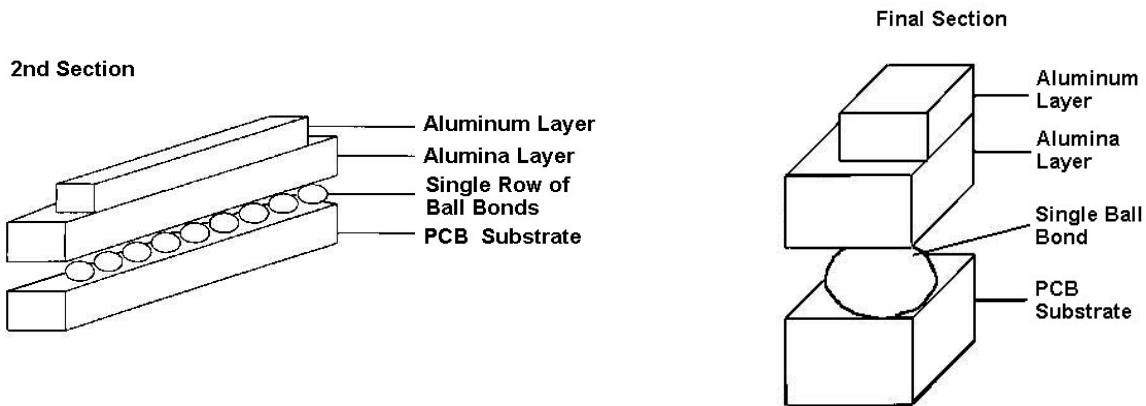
Illustration of the configurations used during cutting to produce the final section for ball bond testing. Two cuts are initially made to make a thin cross section slice (2nd section) and then a final cut perpendicular to the first two is made, creating the single ball bond structure (Final section). The saw kerf size and the parallelism of the cuts is the most critical factor, with a slight error creating sections through the ball bonds.
